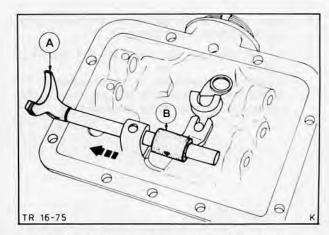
A – Remove reverse gear selector fork and rail B – Reverse gear selector dog on rail
